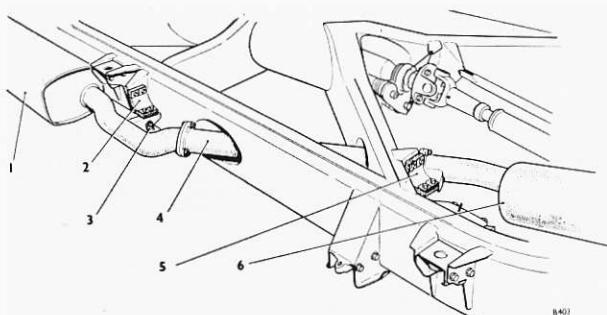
'Through the frame' exhaust system (later Phantom V cars)
